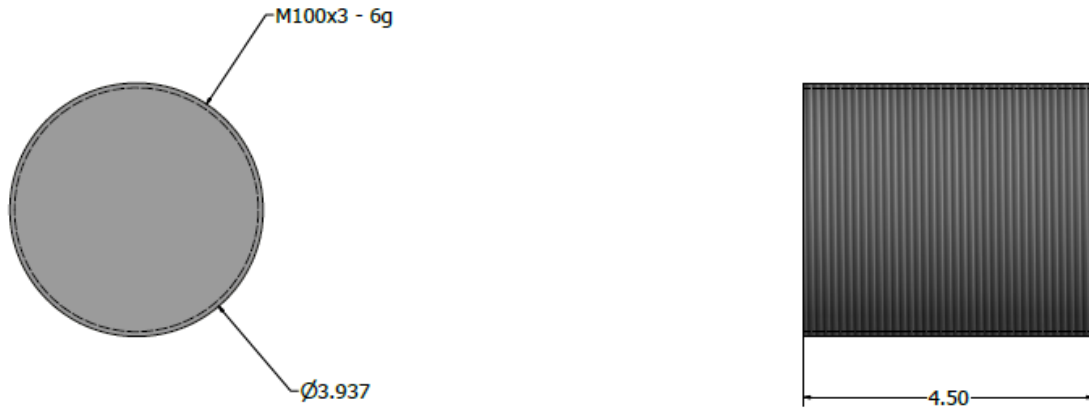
(b): Load Cell – Connecting Plate Connecting Rod
